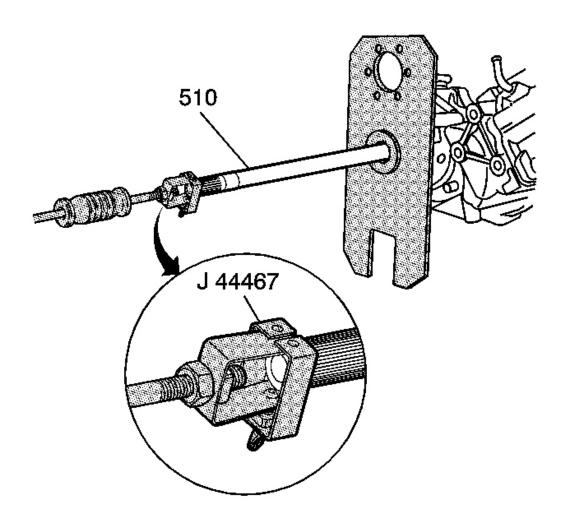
View Of J 6125-1B & J 44467 Courtesy of GENERAL MOTORS CORP.
